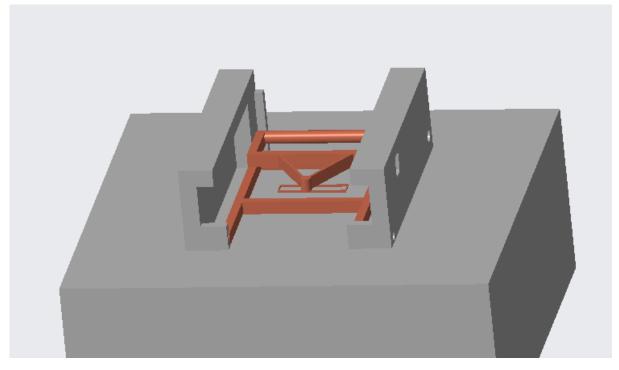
While not aiming, the parts can be folded on top of each other to take up less space and to protect the flip up sight. In this position the removable attachment is also able to be fitted on top of the flip up sight ad slides onto the rail.
